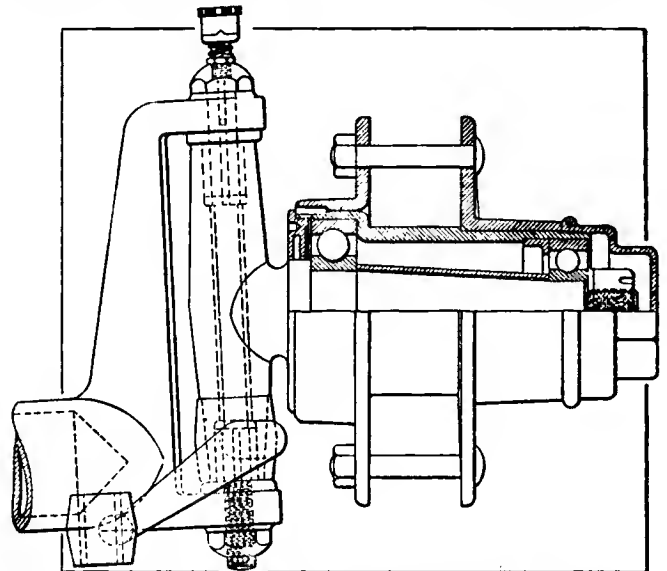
Front wheel hub with annular ball bearings in which the center of the wheel is too far from the center of the knuckle pin
